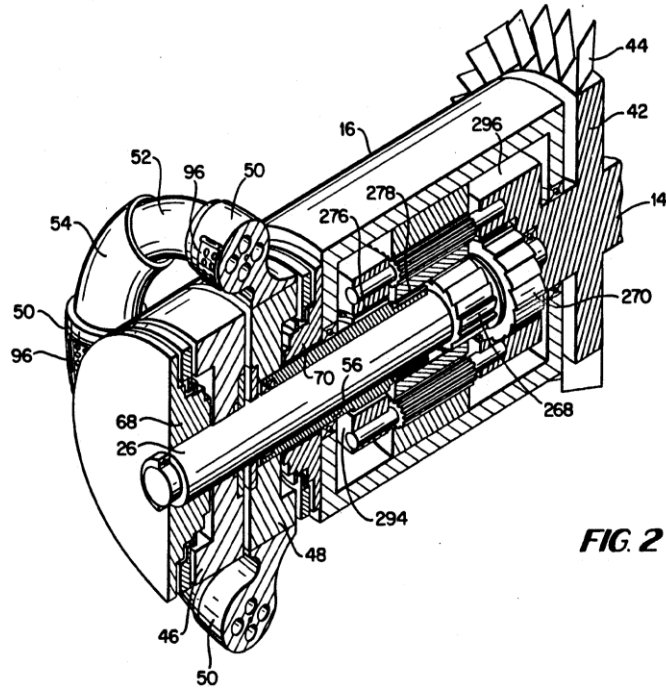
Example of toroidal engine with clutch mechanisms transferring power through a planetary gear train (64).
